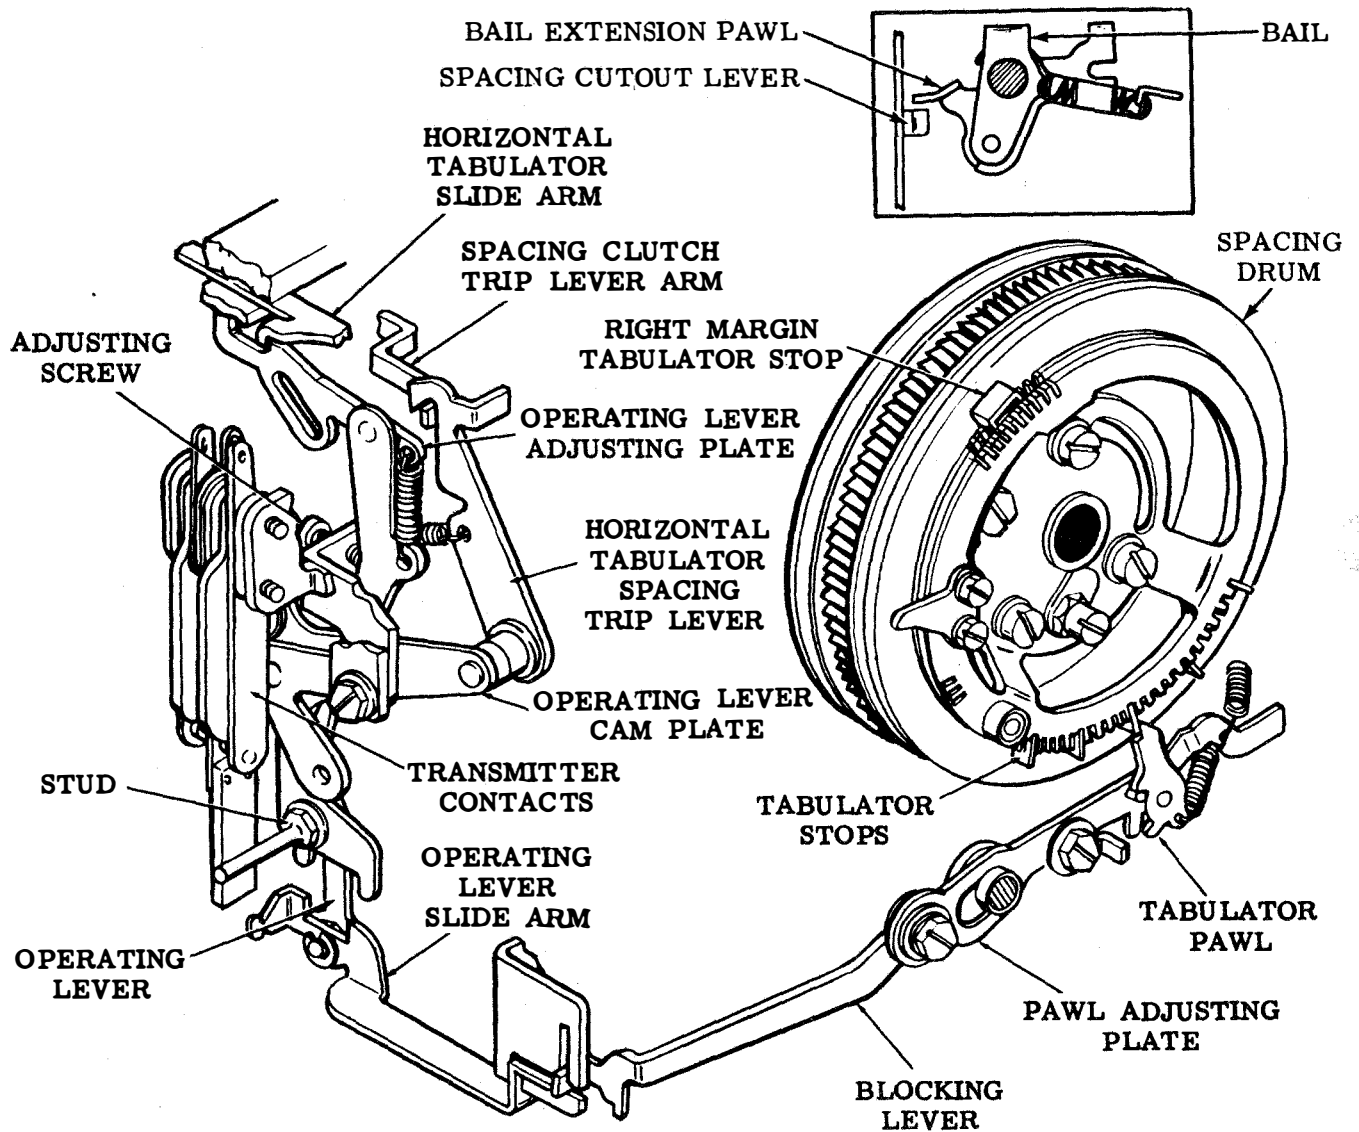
Horizontal Tabulator Mechanism, Left Front View
